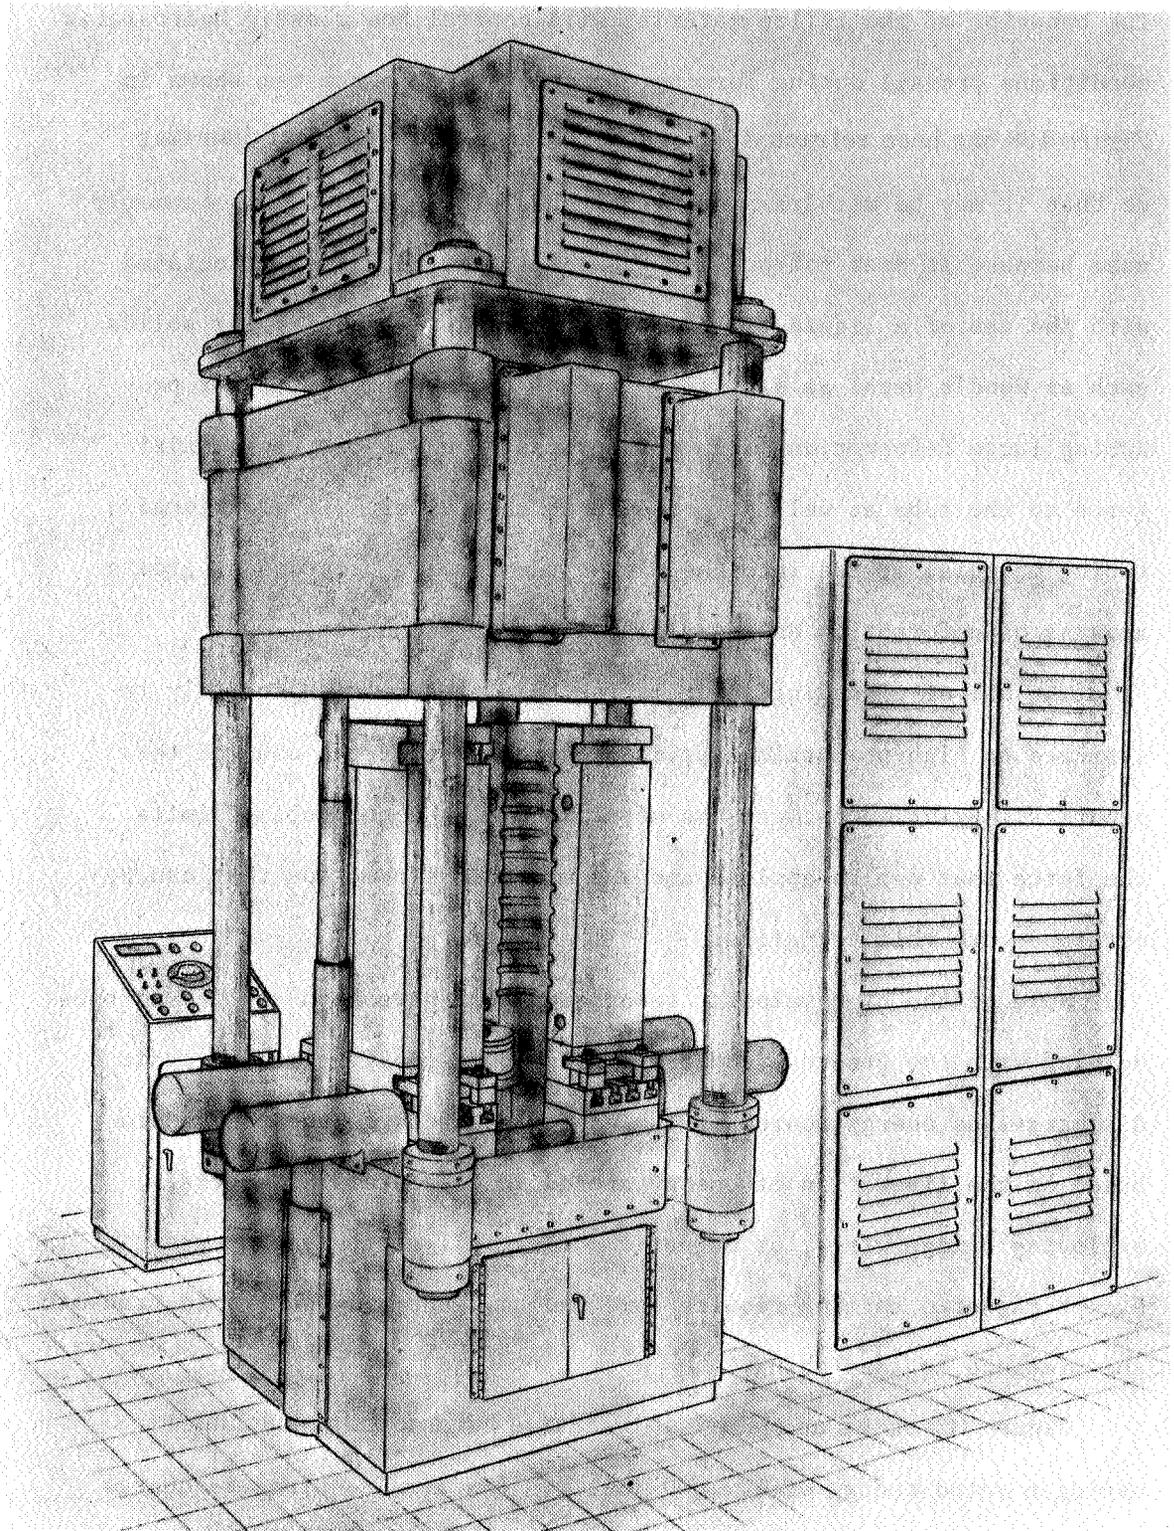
SCHEMATIC DRAWING OF ELECTRICAL DISCHARGE
